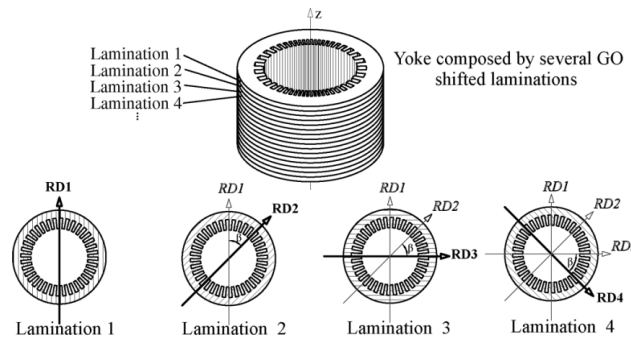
Grain-oriented steel assembly for rotating electrical machines [123] (Radial direction - RD)
